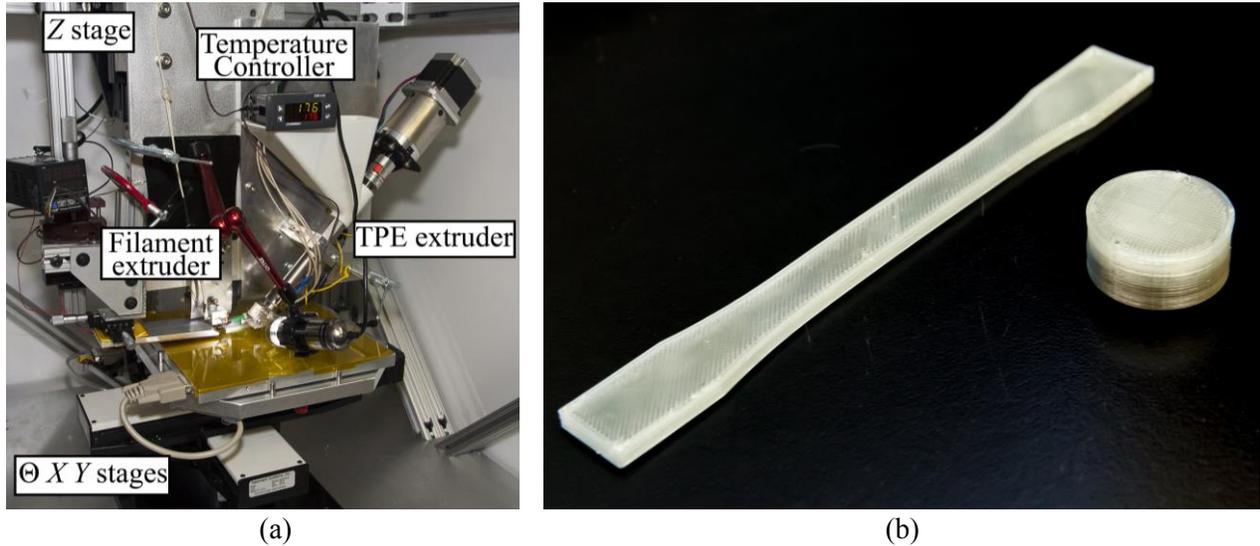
Photograph of the FEAM additive manufacturing system equipped with the TPE mini-extruder (a); Test specimens manufactured using the mini-extruder for tensile (ASTM D638-02a) and compressive (ASTM D575-91) testing of material properties (b).
